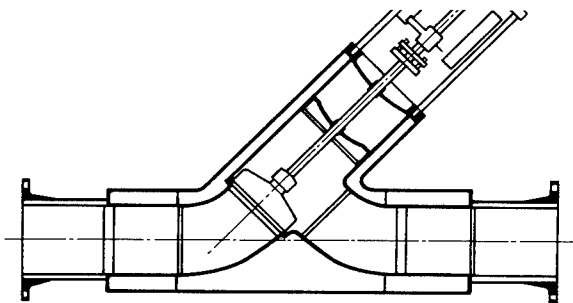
Vacuum-jacketed cryogenic valve.
